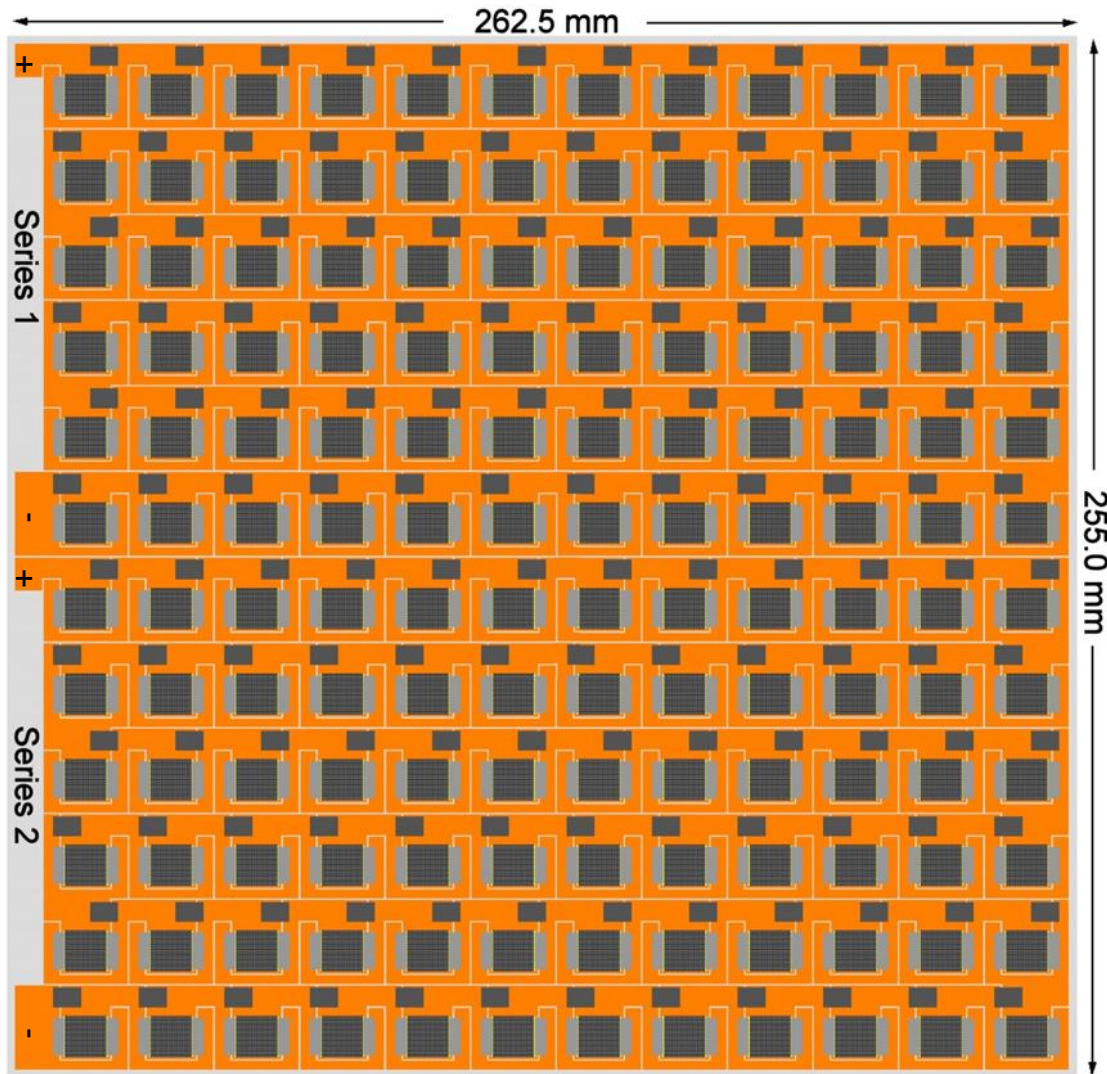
Complete assembly: the dimensions of the aluminum board are shown.
